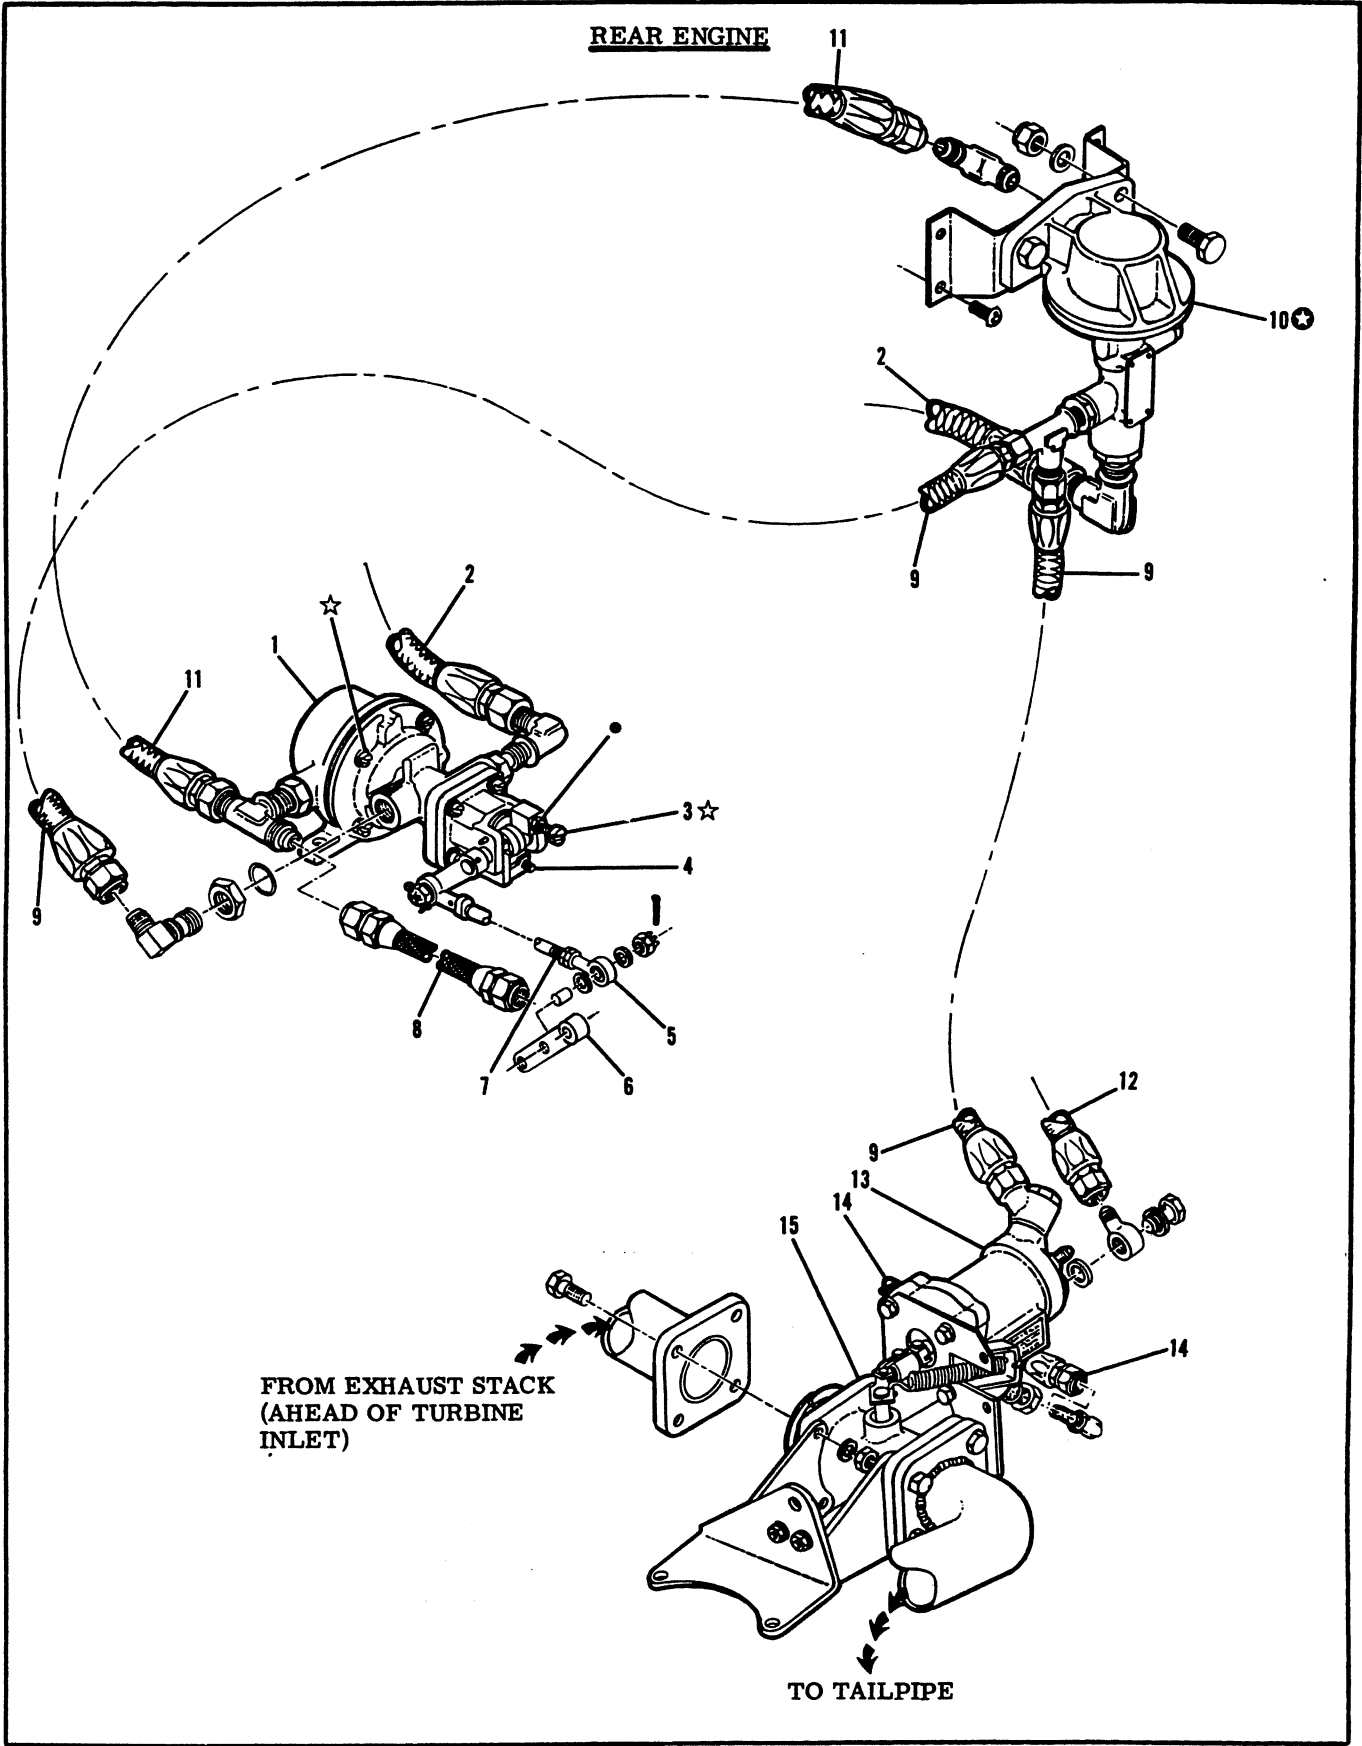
A-8. Controllers and Waste-Gate Installation (Sheet 2 of 2)
